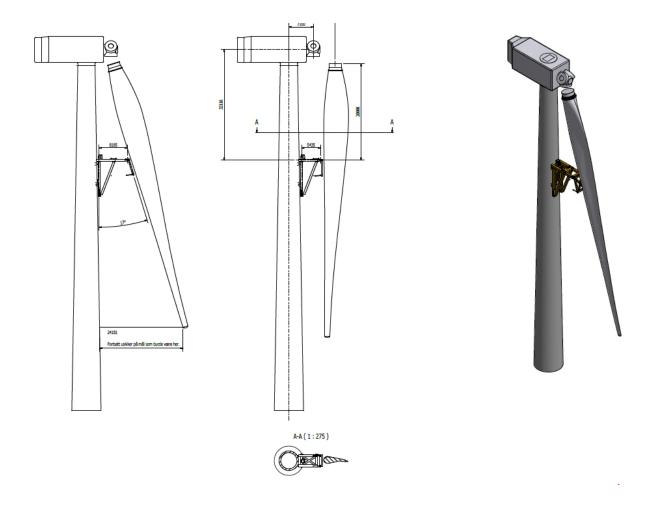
is showing the Blade Installation tool mounted on a typical turbine mast.
